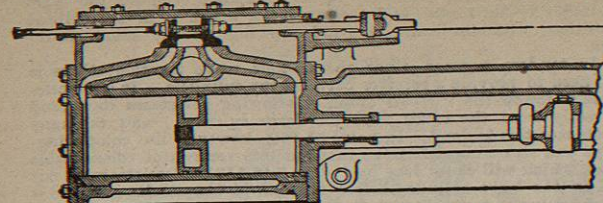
Horizontal Section through Cylinder and Valve-Chest.
